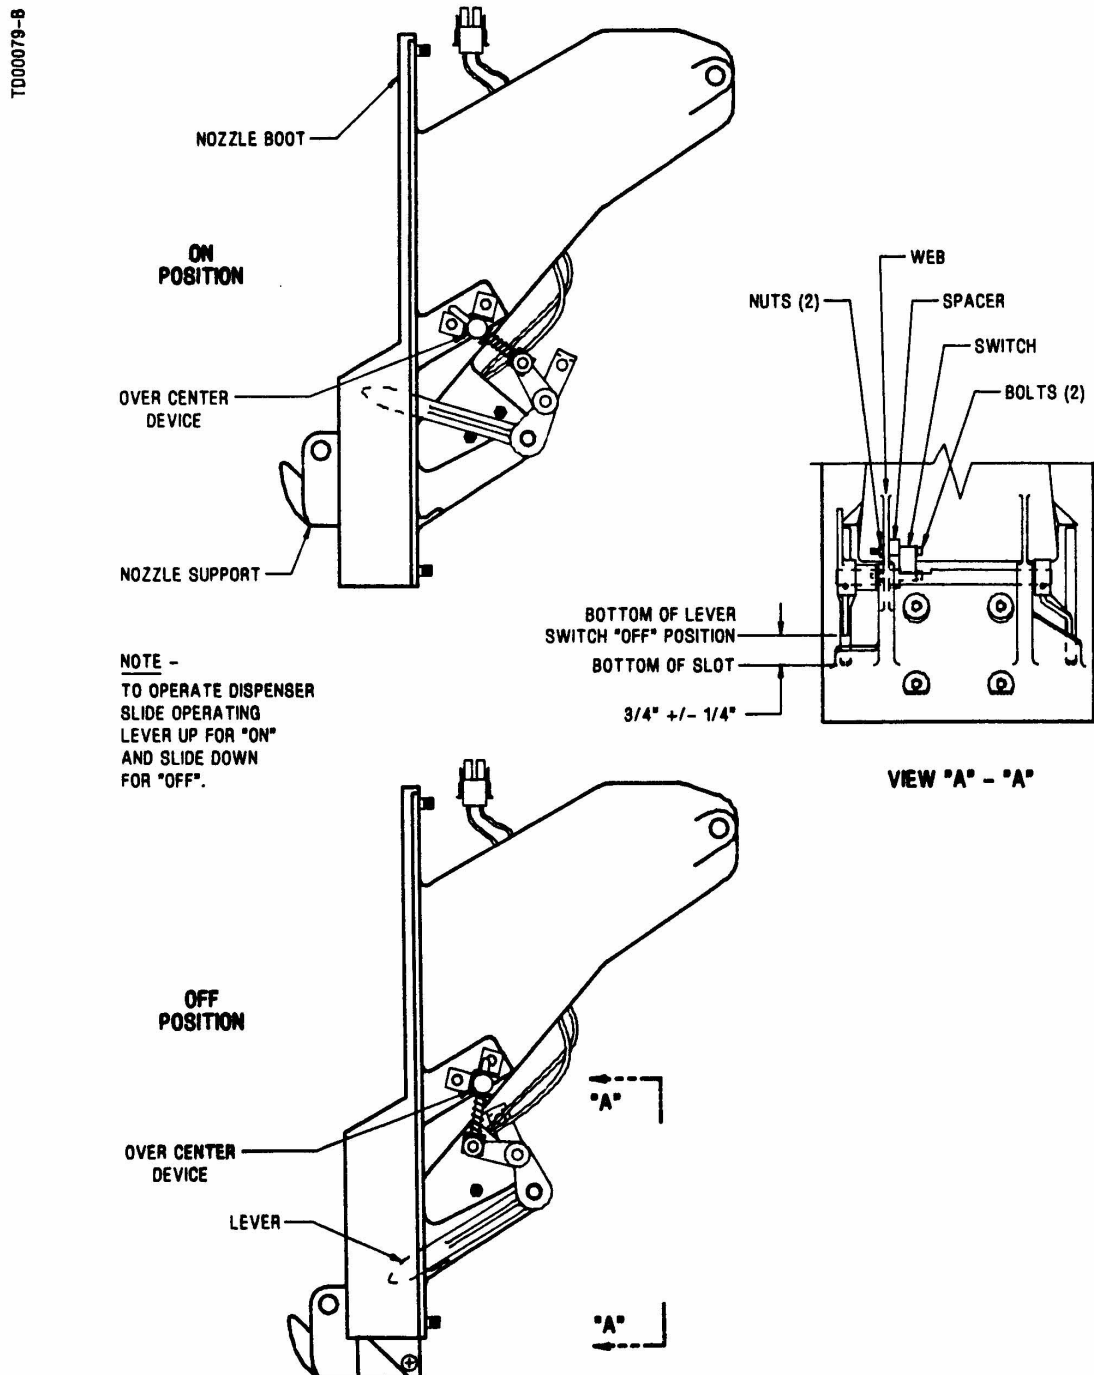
OPERATING CHECK AND HANDLE SWITCH SETTINGS FOR NEW HYDRAULICS MODELS. *Adjustment requirements are minimal with this design.
